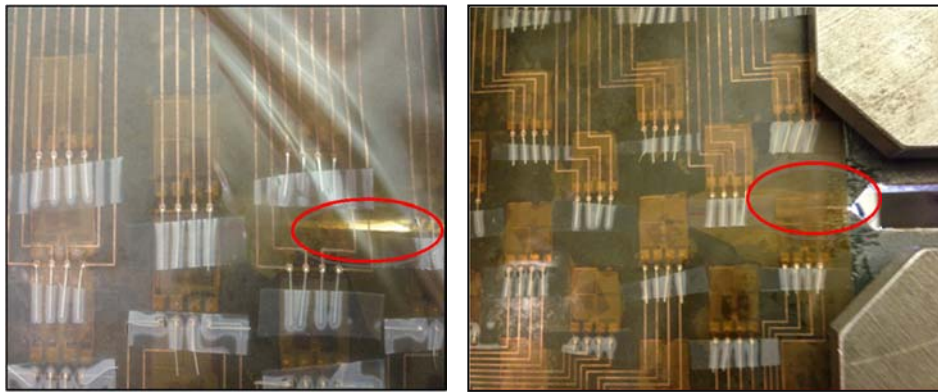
Initial crack occurring in Specimen No. 1 (left) and No. 2 (right).
